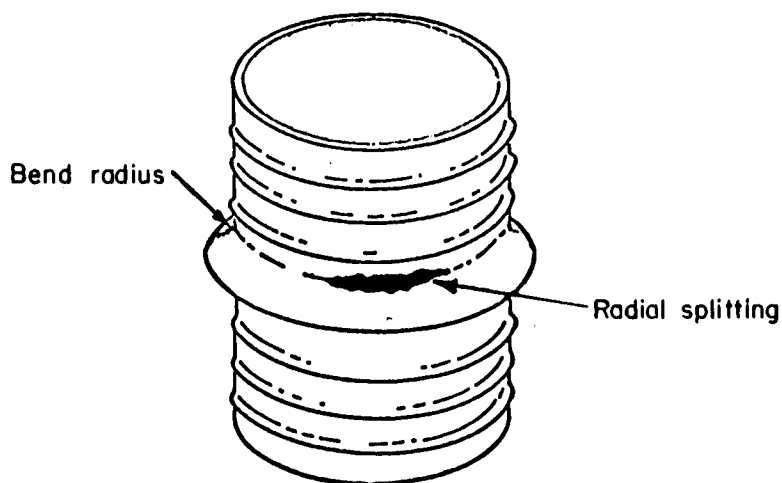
EXAMPLE OF FAILURE IN TUBE BULGING
